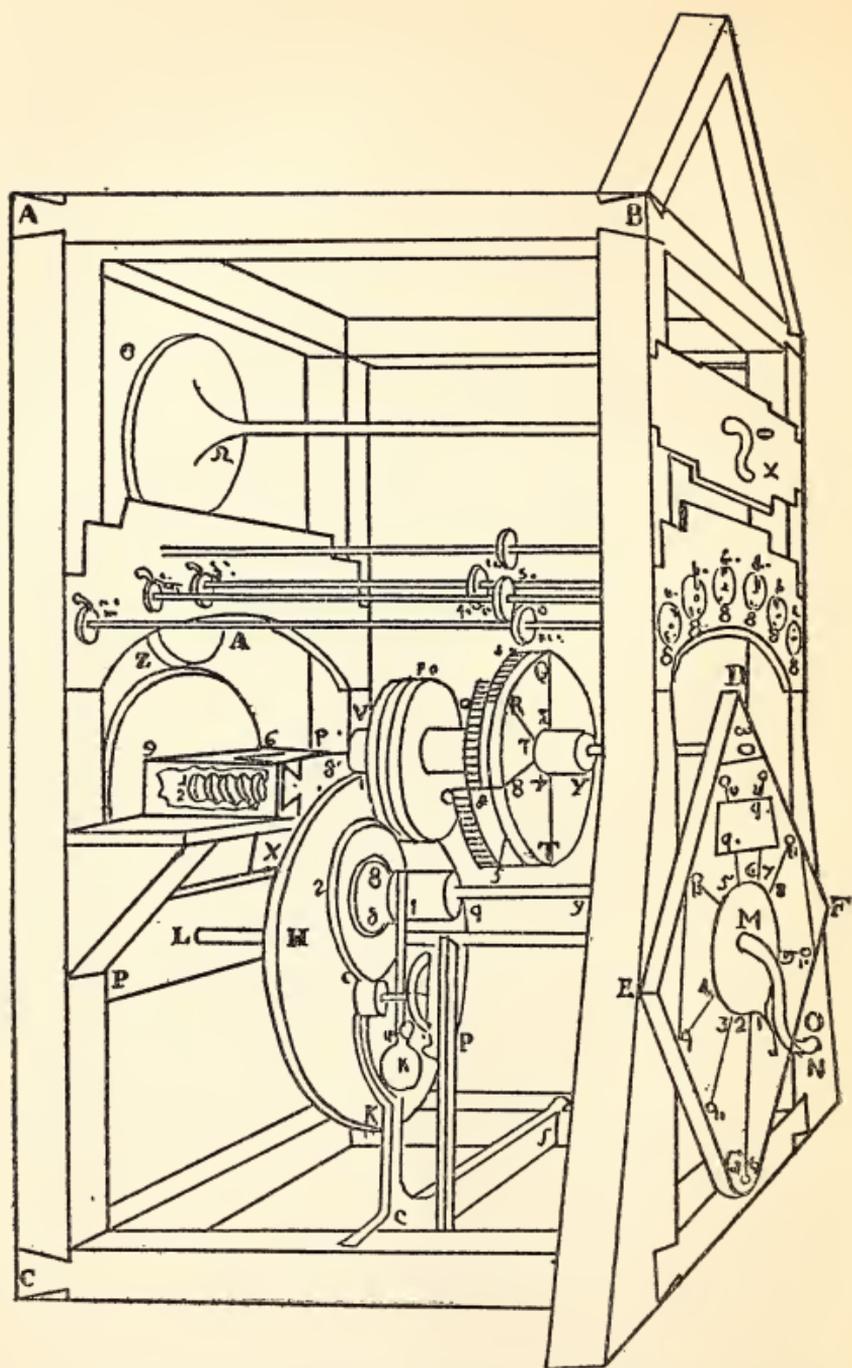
LEIBNITZ CALCULATING MACHINE.
